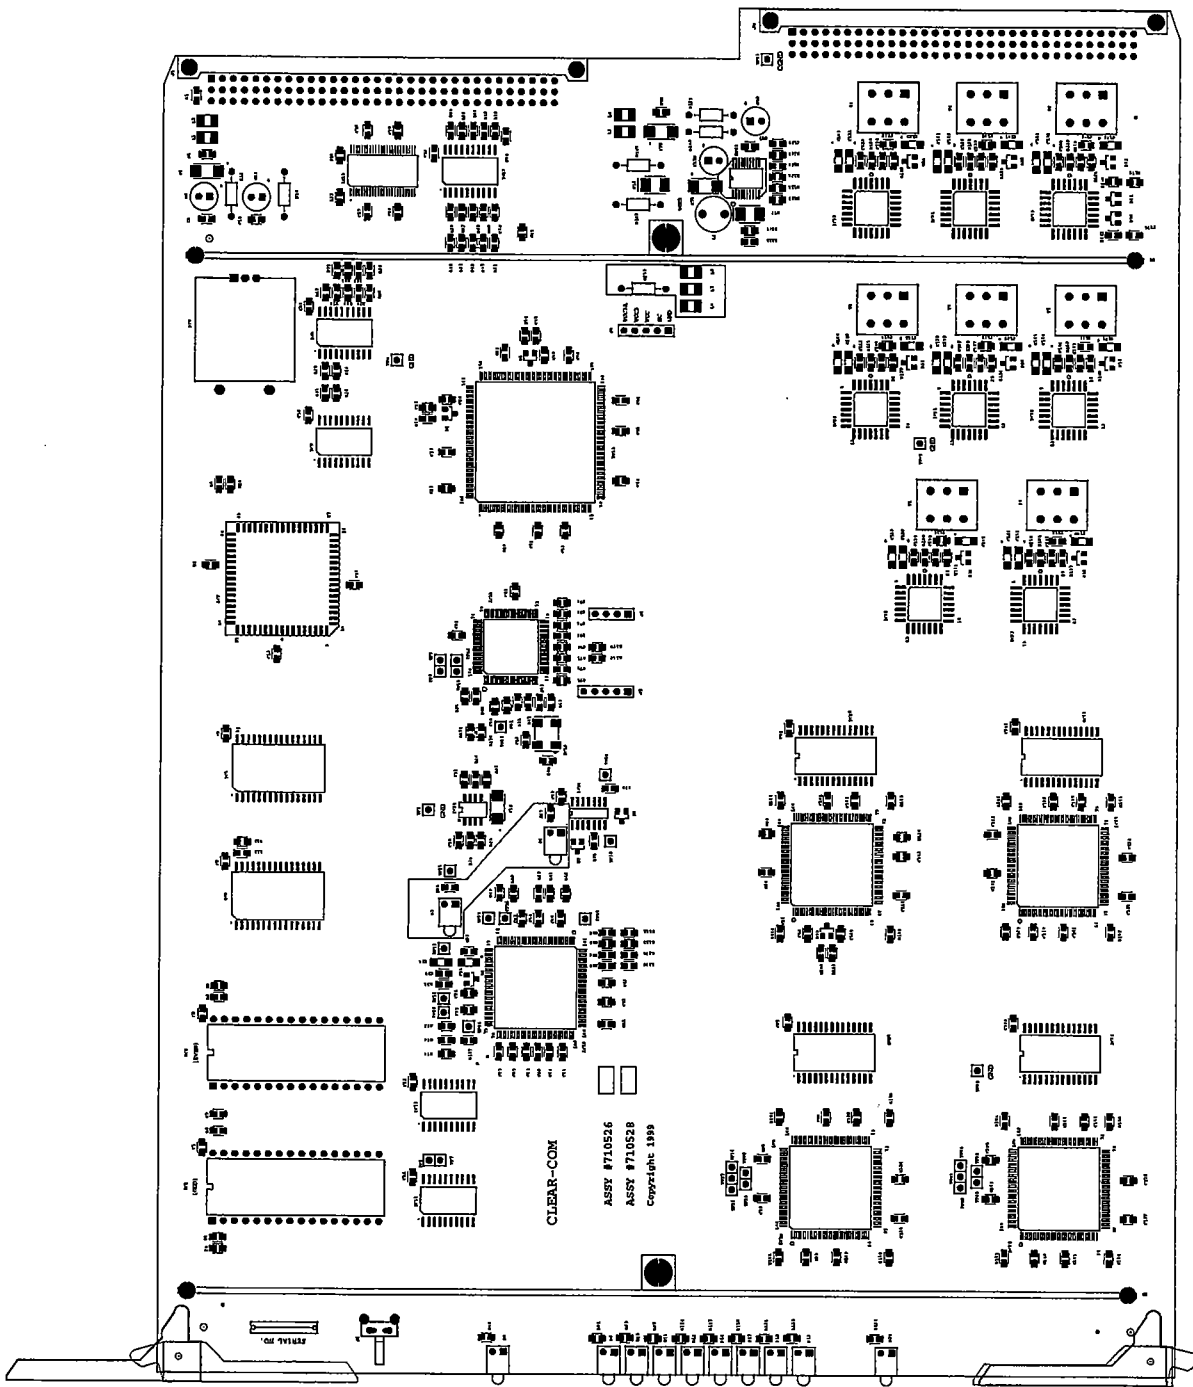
Assembly Drawing— MVX-D8 PCB,
